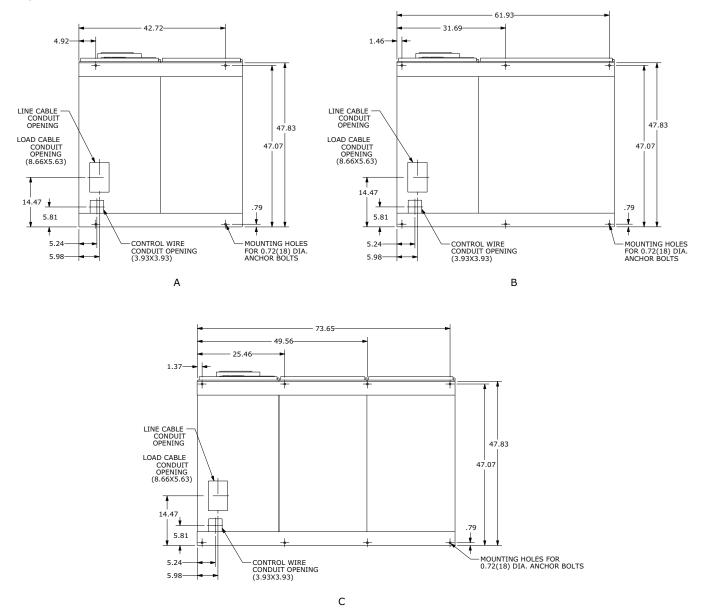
A-Frame: Bottom view (VFD 2300/3300/4160V), in.
